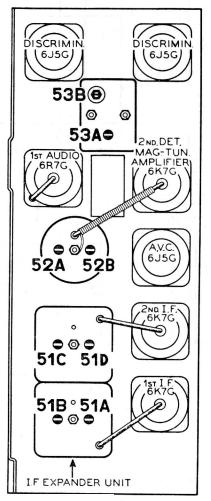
Top View of I. F. Unit Showing Compensator Locations
